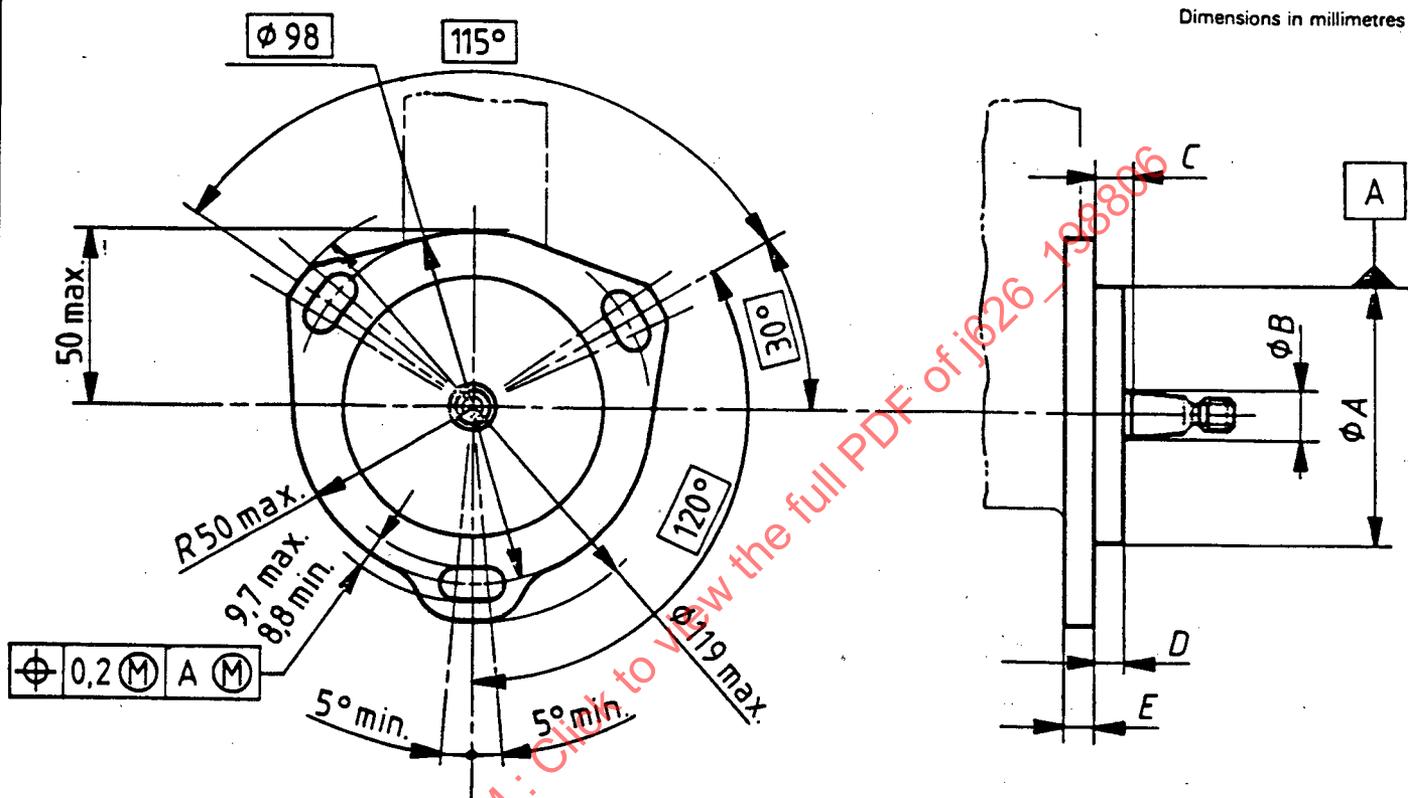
Fuel Injection Pumps - Type 5 End-Mounting Flange
